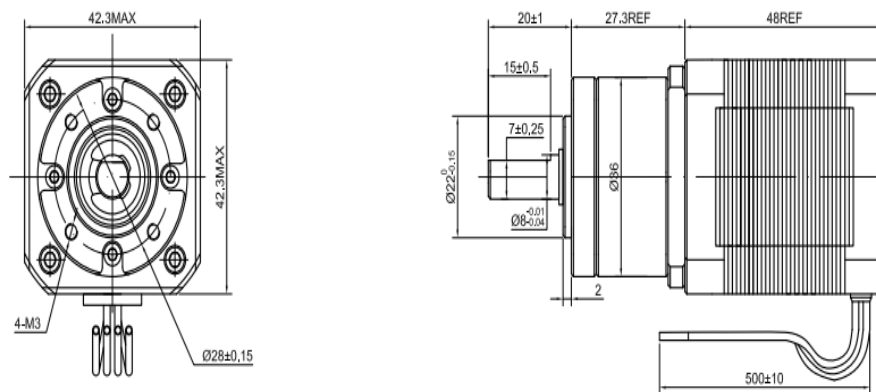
Nema 17 Bipolar Geared Stepper Motor Dimensions
